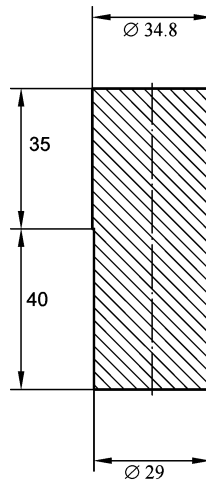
Compaction mould plug (tolerances $\pm 0,1$)
